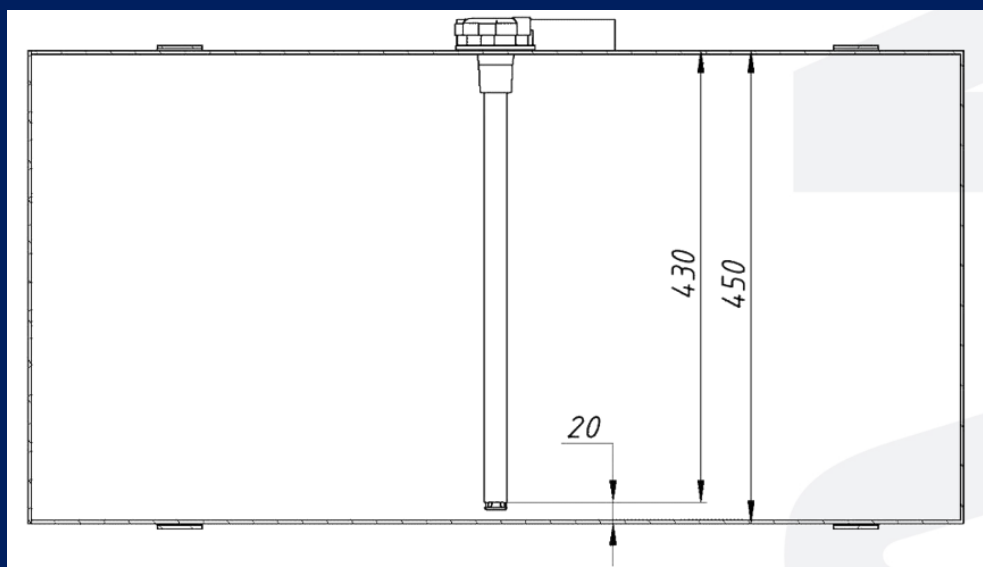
Trimmed BLE FLS mounted on a fuel tank
